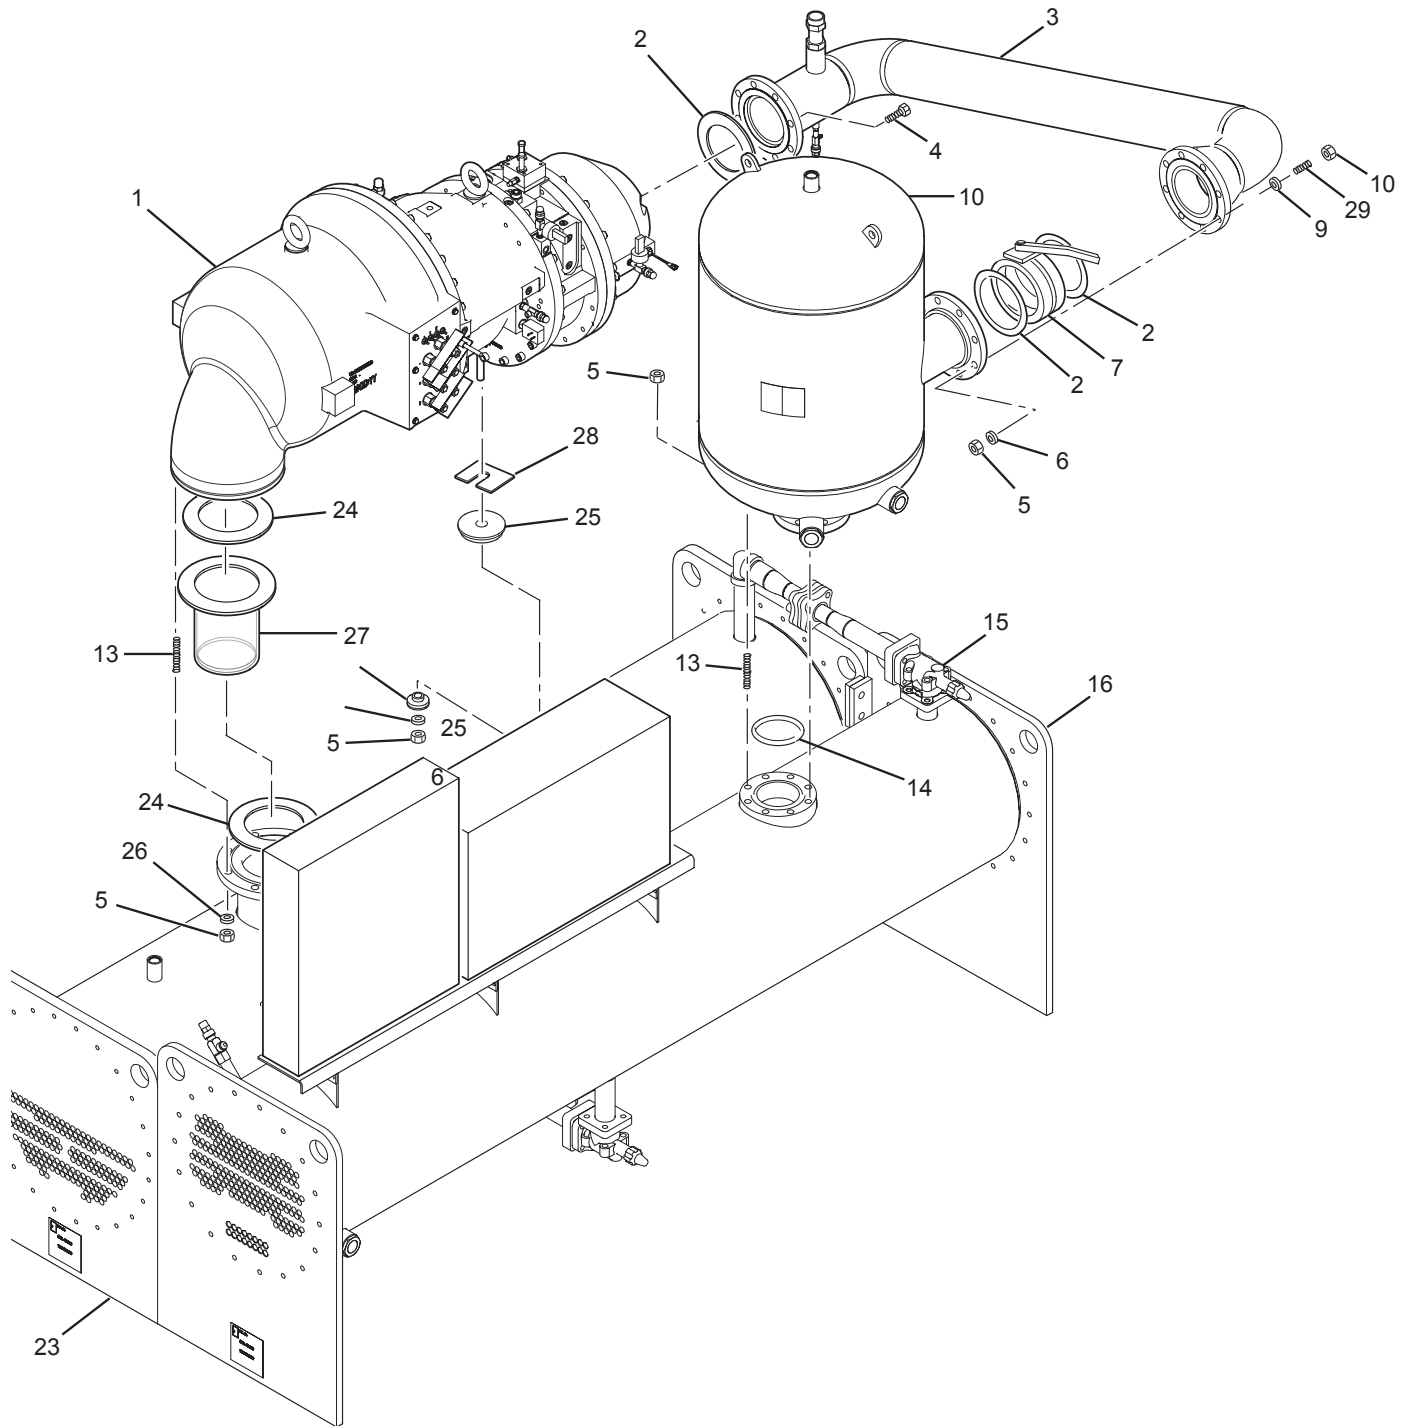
FORM 3 FIELD ASSEMBLY – EXPLODED VIEW
